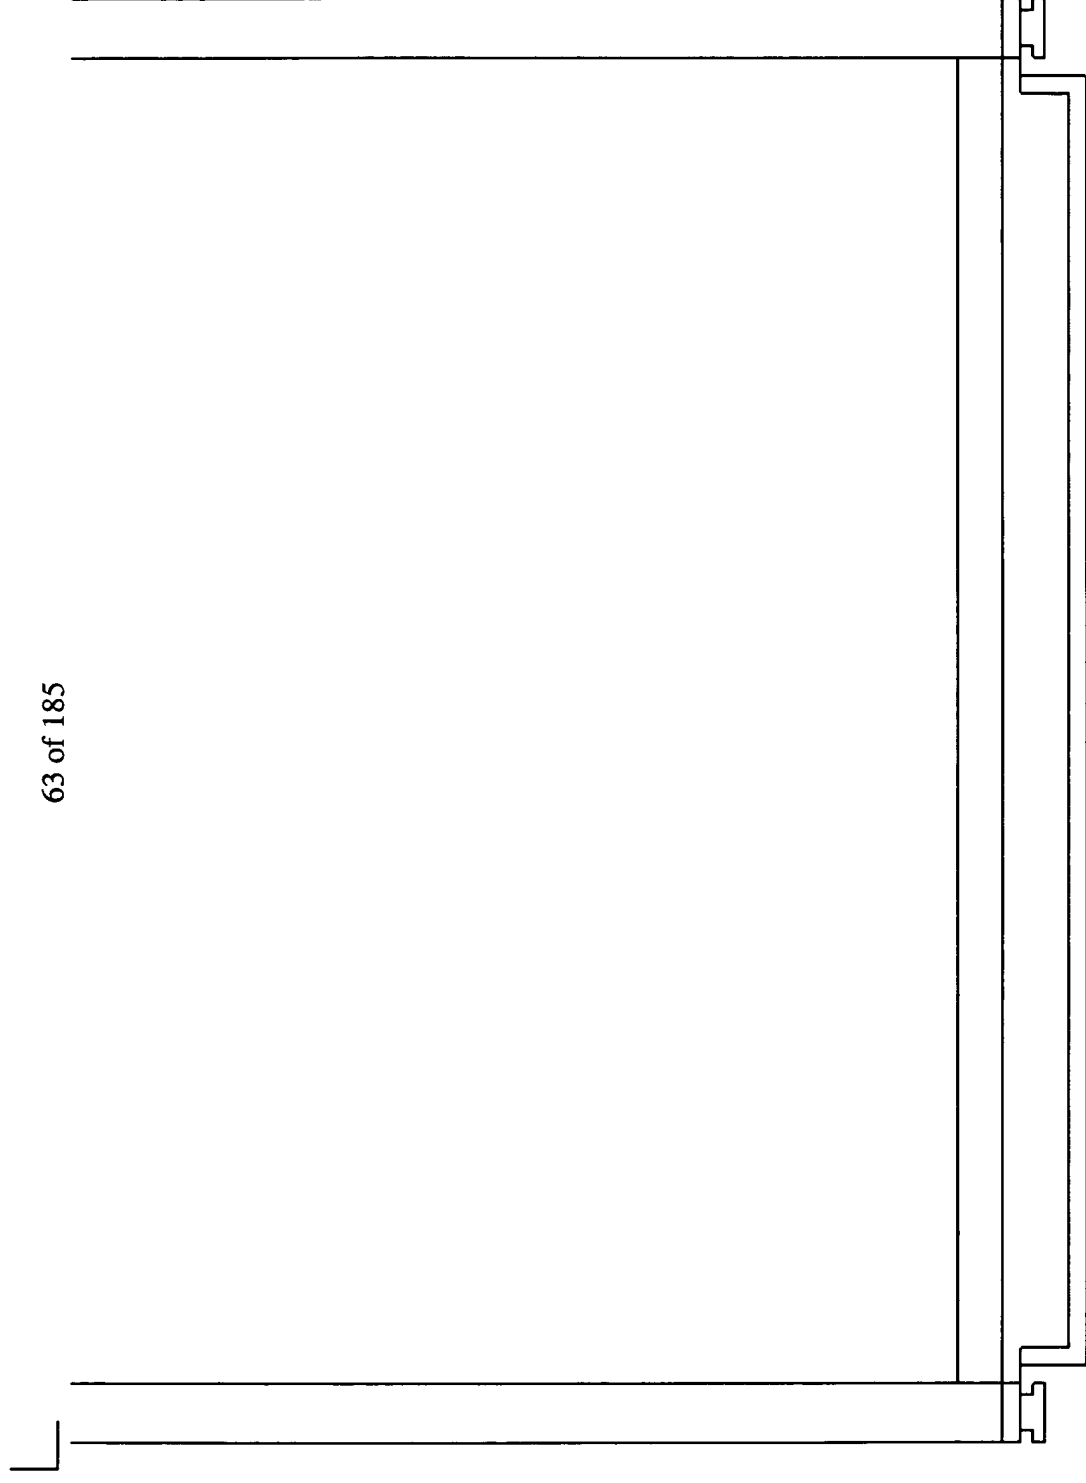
B: Top view of the right end of a ceiling frame (40 foot high cube collapsible cargo container)
